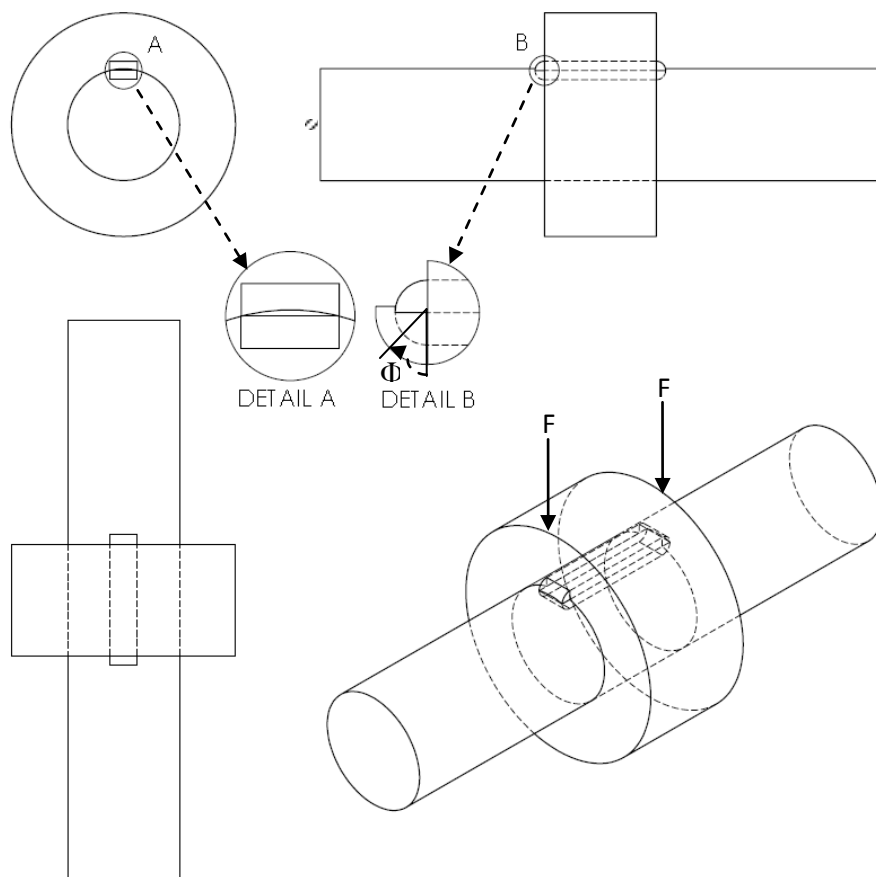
Bending model of hub, key and shaft with sled runner keyway
